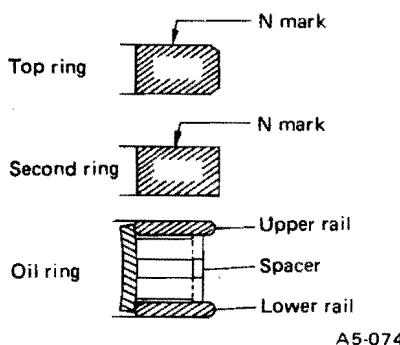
Cross section of piston rings (Nippon Piston Ring)
